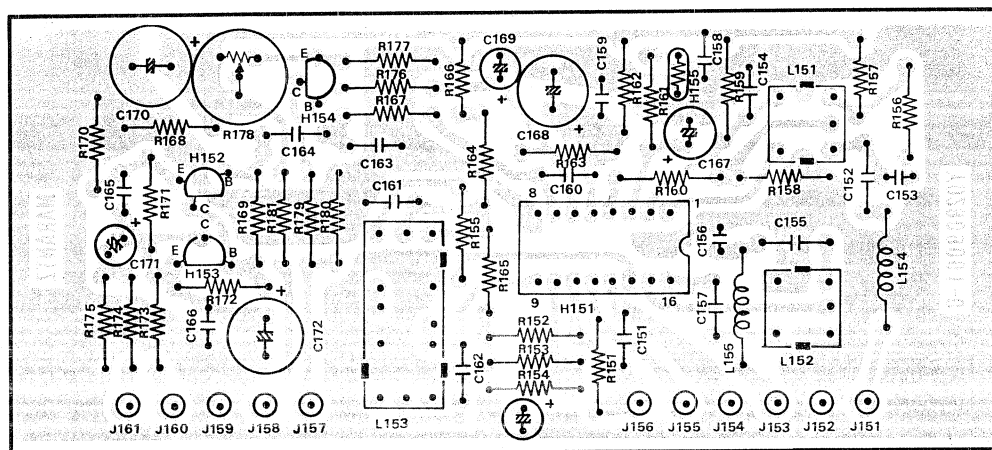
AM Tuner Board – P150 Component Assembly Diagram
